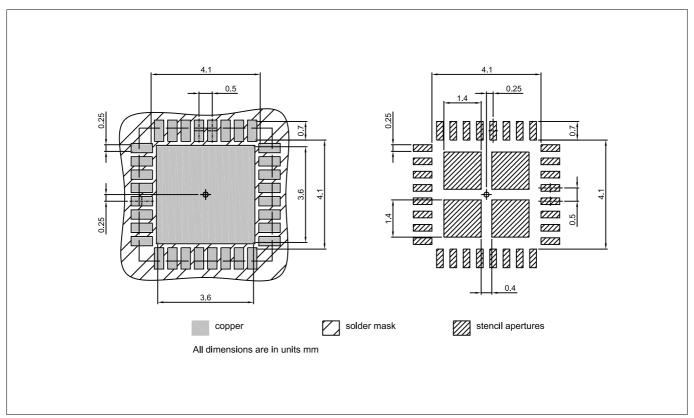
Recommended footprint PG-UQFN-32-1,-2
